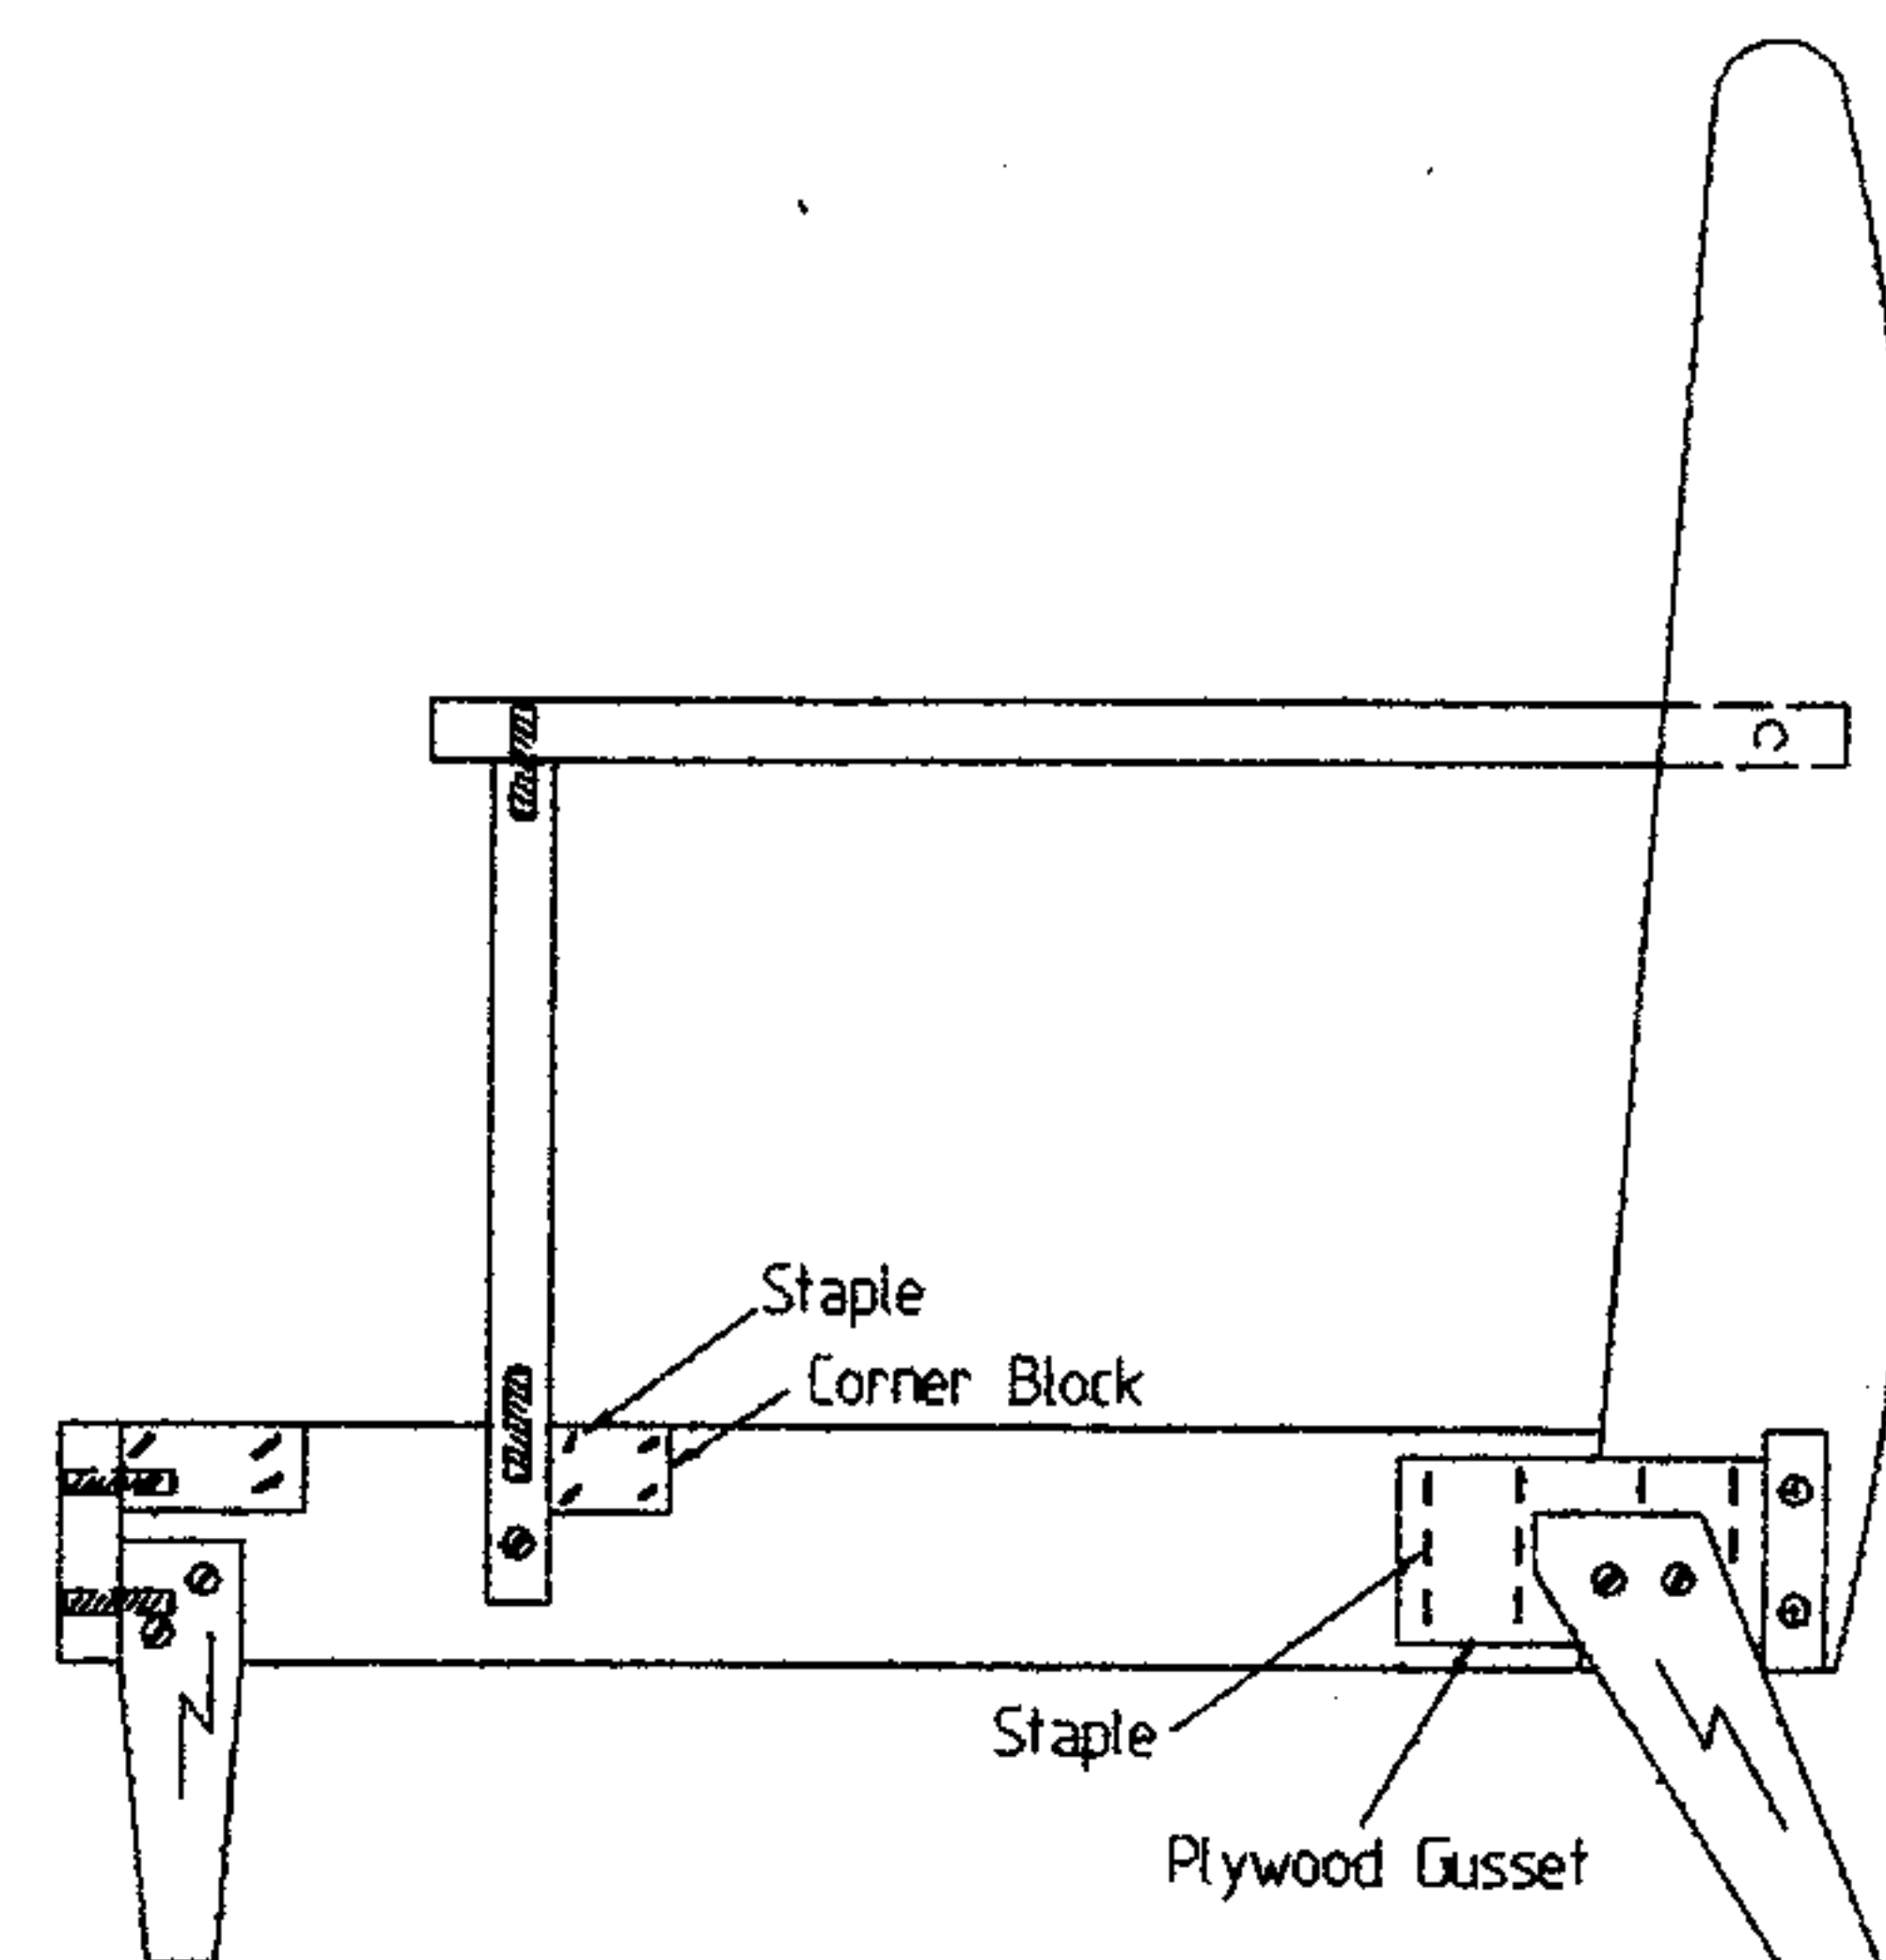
Reinforcement of side rail to back post joint with stapled gusset plate.
